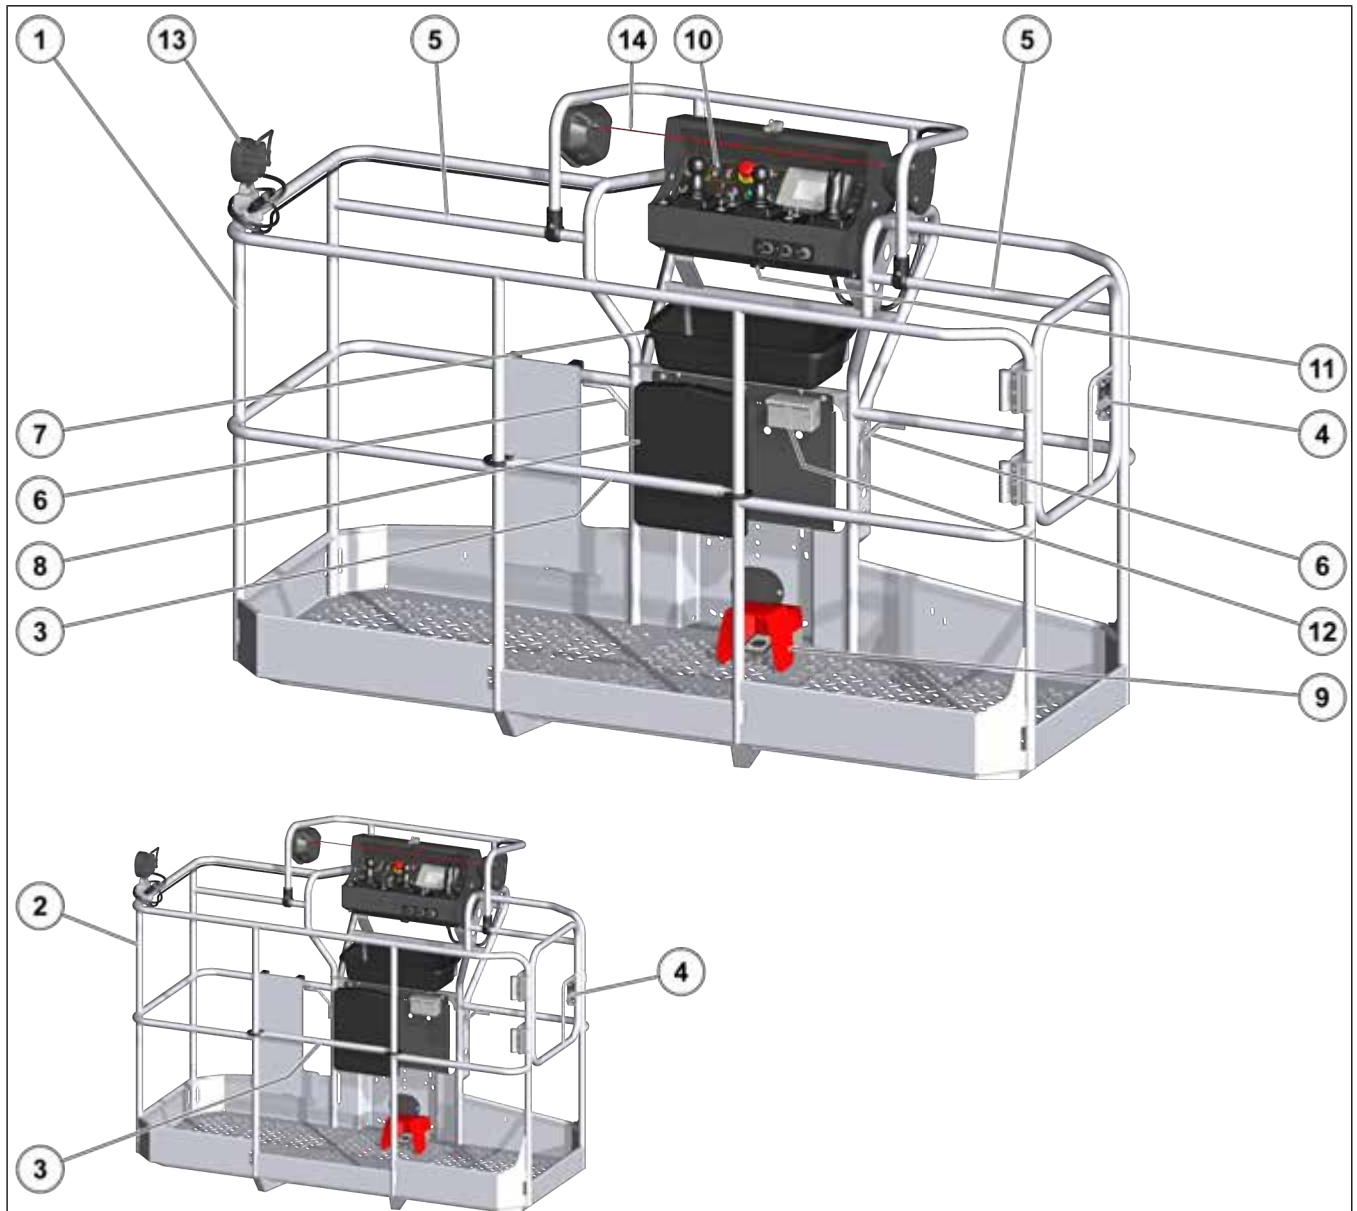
Location of the machine components 3 - ATJ 46 E S1
